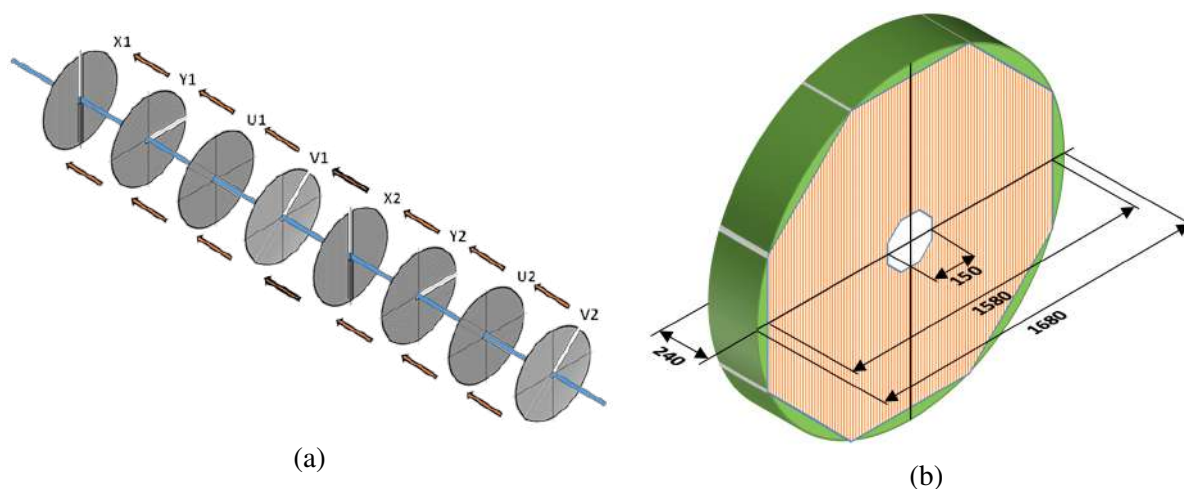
(a) ST end-cap consisting of 8 coordinate planes assembled together. (b) Common view and main dimensions.
